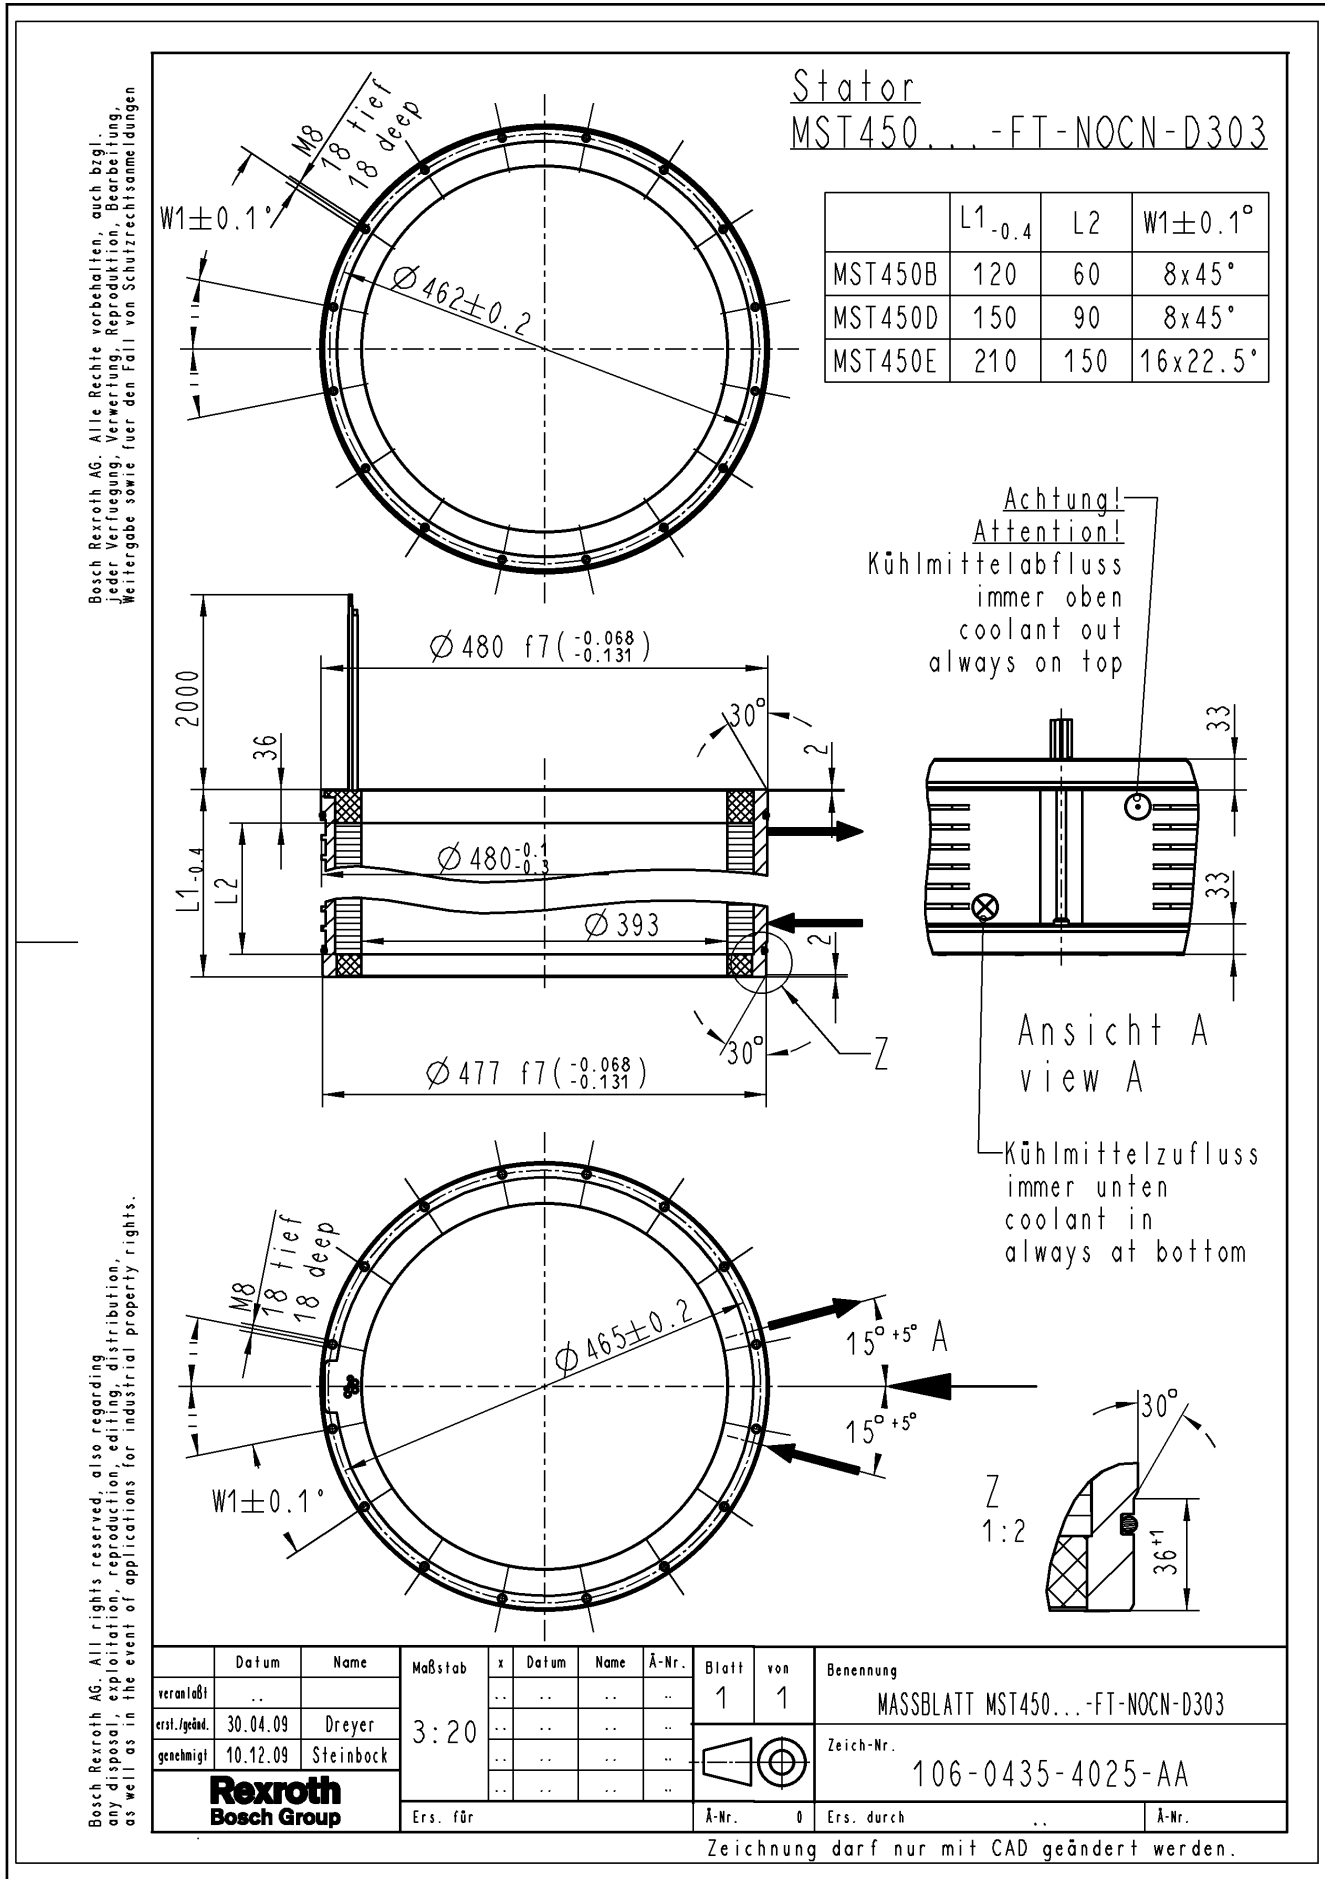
Dimension sheet MST450, electrical connection "CN" (design "D303")
